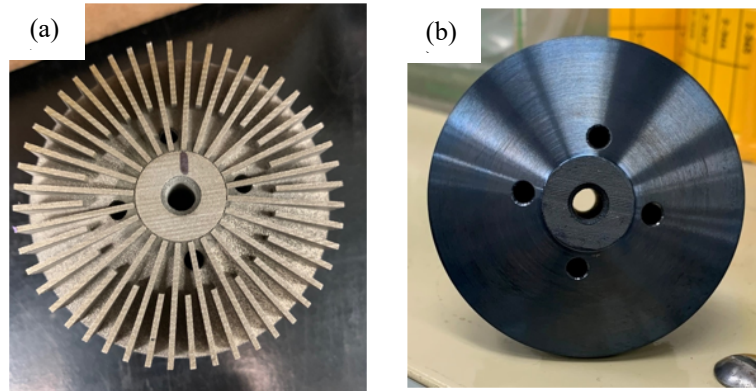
(a) Underside of as-fabricated supported turbo wheel and (b) post-machined underside.
